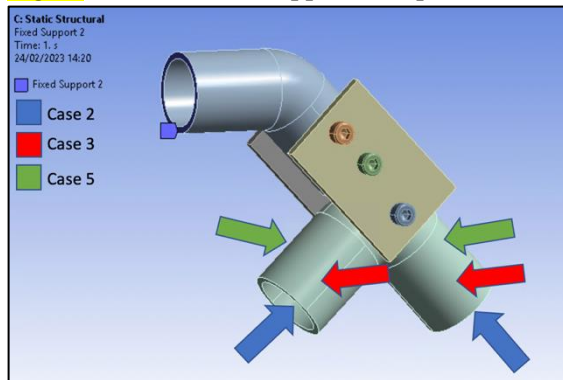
Detailed Breakdown of Front Wheel Assembly Loads
